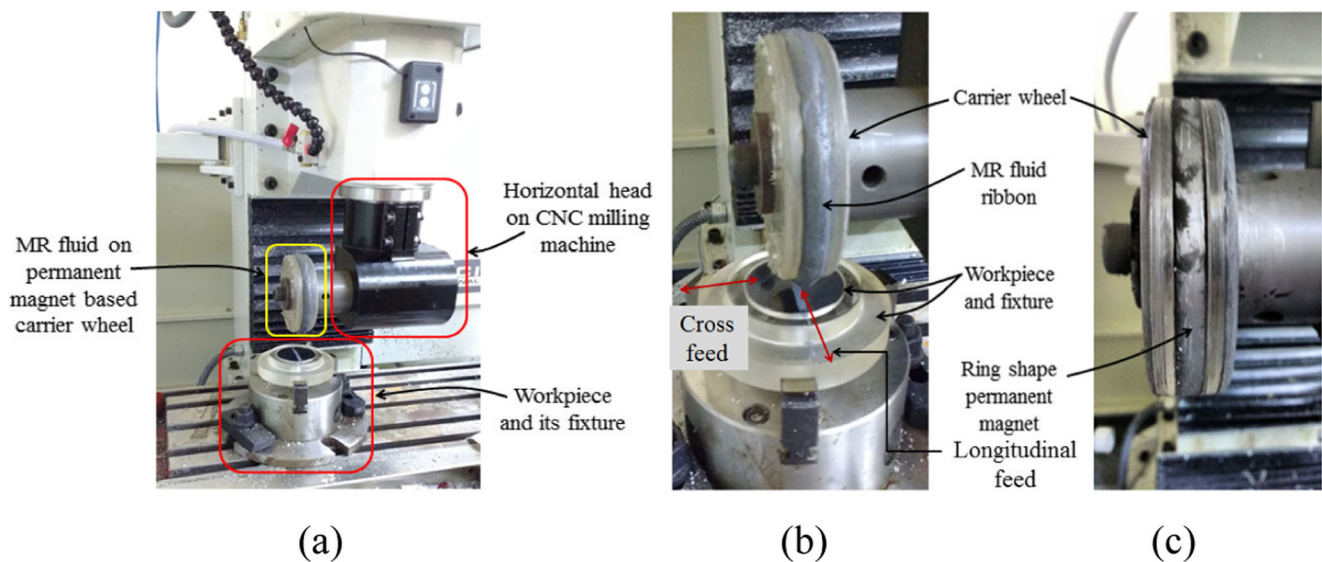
a MRF experimental setup on four-axis CNC milling machine. b Carrier wheel with MR fluid. c Carrier wheel without MR fluid
